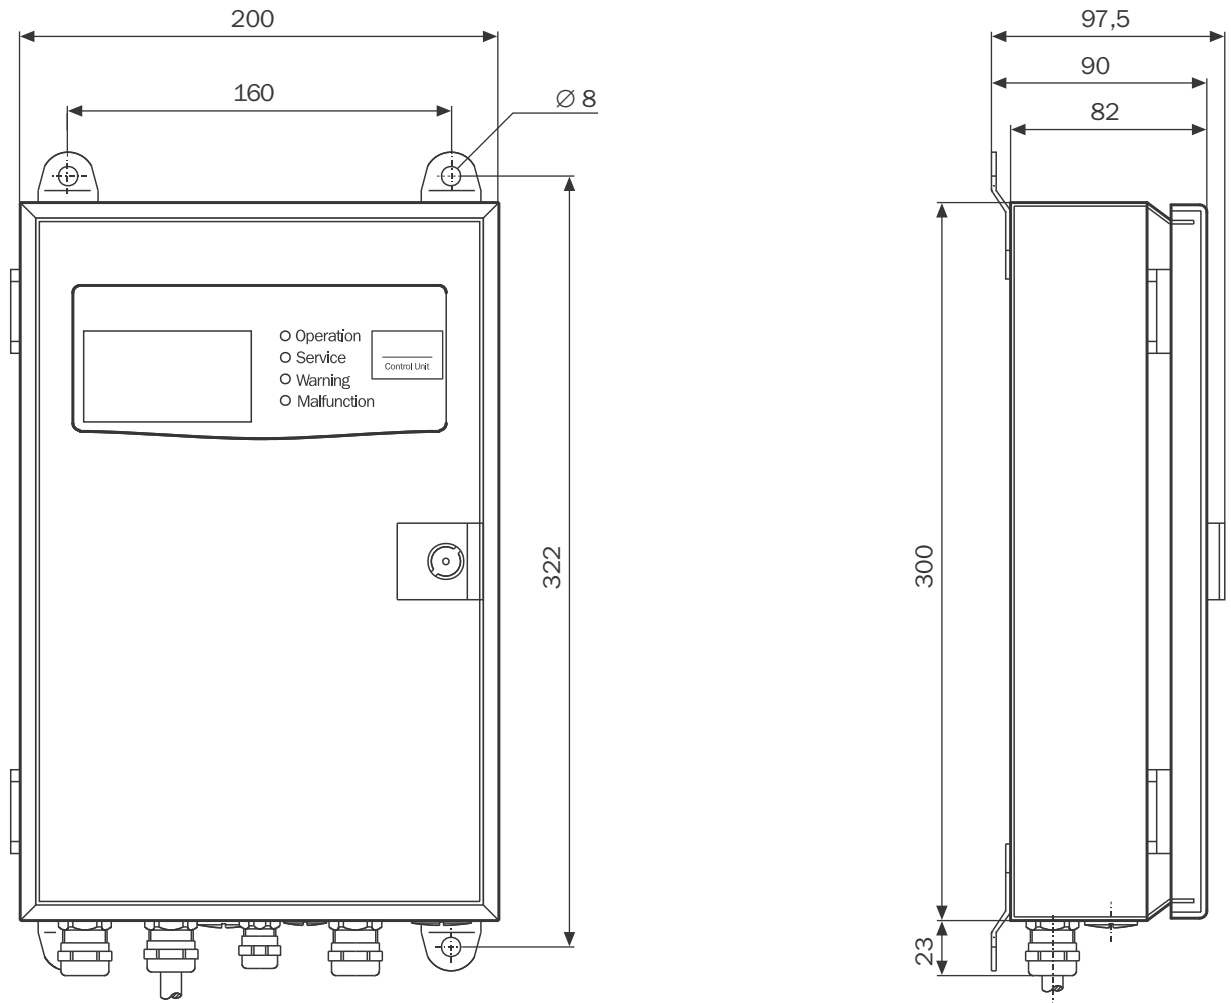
Dimensions of GM35 evaluation unit, sheet metal enclosure version
